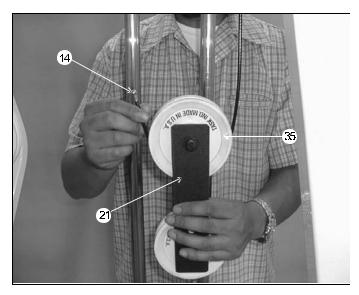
Assemble the Double Pulley Plates 1/8 X 2 X 9 (#21) using two Nylon Pulleys 4 1/2 Rd. (#35), two Hex Head Cap Screw 3/8-16 X 1 3/4 (#79), four Flat Washers SAE 3/8 (#90) and two Nylon Insert Jam Lock Nuts 3/8-16 (#86). Refer to Fig. 1 on page 17 for further detailed illustration of this cable routing. Next, route the Lat Cable (#14) through the Double Pulley Plates 1/8 X 2 X 9 (#21), as shown above. Note: The four holes on the Double Pulley Plates 1/8 X 2 X 9 (#21) are used to adjust the cable tension once the cable routing has been completed.
